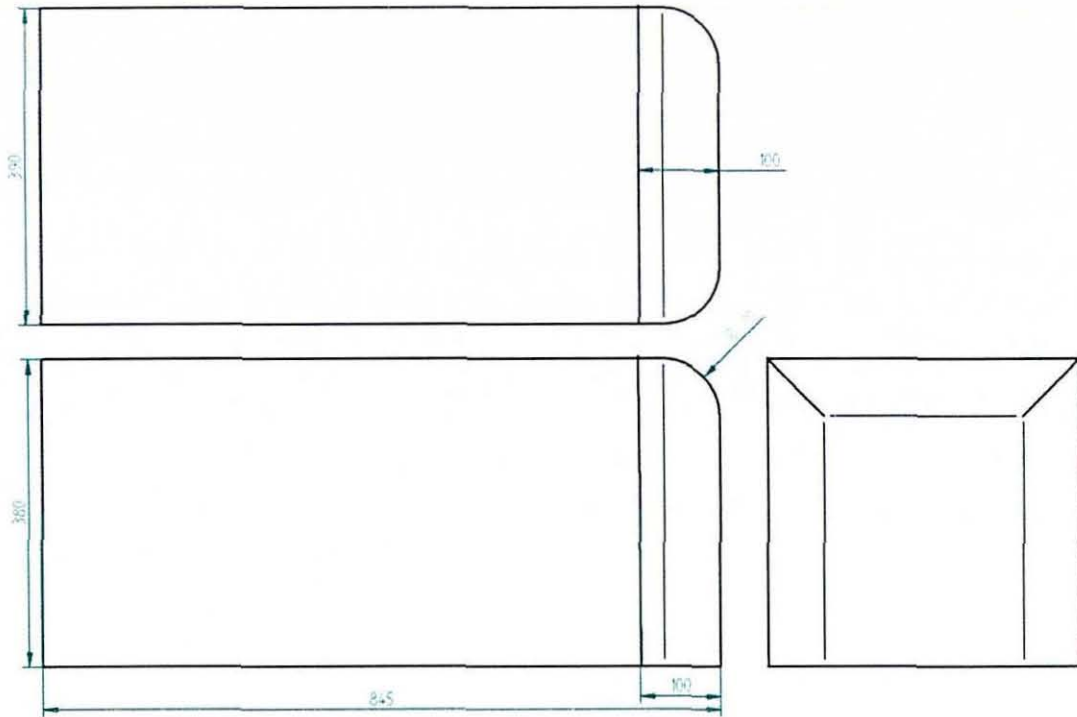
1-box model drawing with dimensions in mm (70mm front section fitted)
